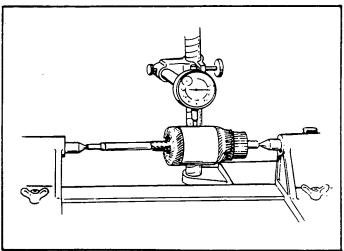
CHECKING ARMATURE SHAFT RUNOUT
